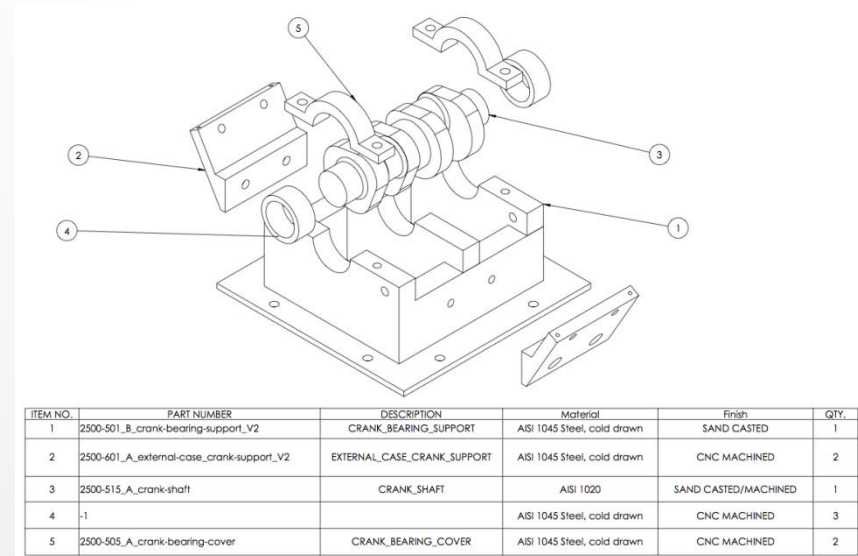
Detailed Drawing and Bill of Materials for Disc Crankshaft Subassembly
